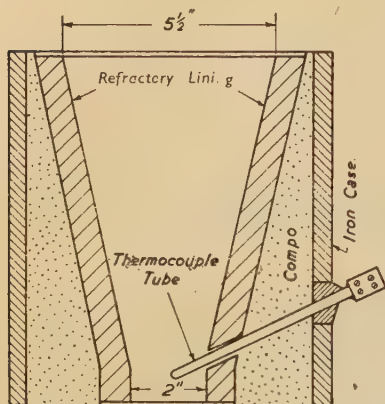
Section of Runner-Box adapted to take Thermocouple.
